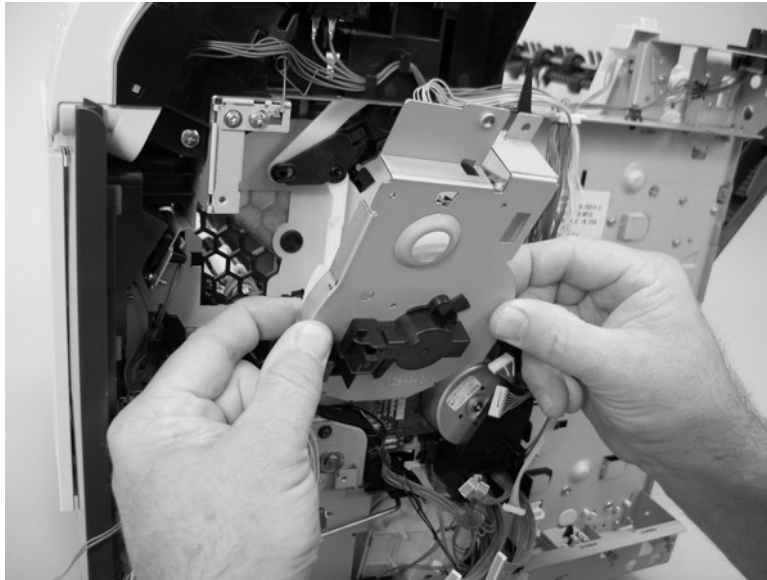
Remove the drum-drive assembly (3 of 4)
